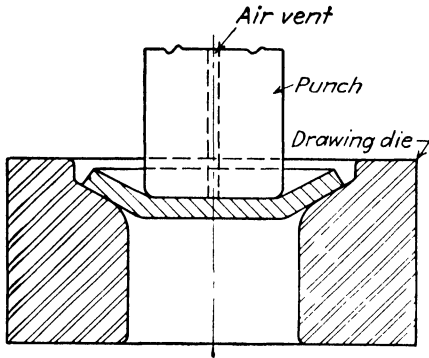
Punch in descent, "centered" over a blank and starting to draw a cupped shell into a die without using a blank holder.
